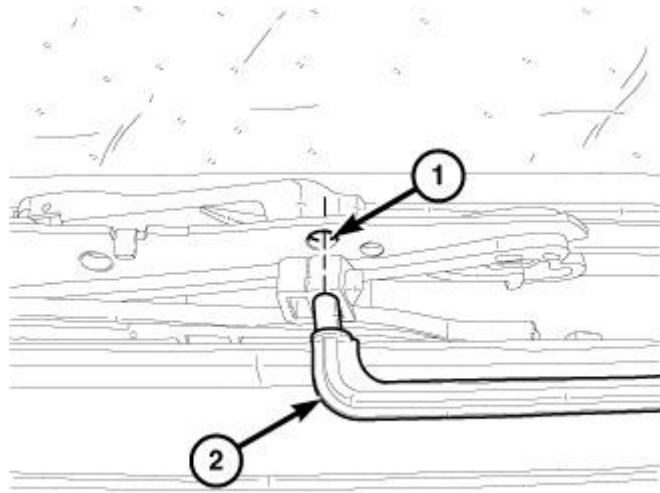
Glass Guide/Guide Carriage Assembly, Notch & Locking Tab
